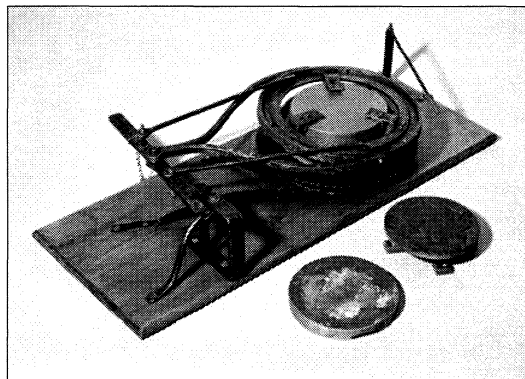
Hand-operated polishing and grinding machine used by Sir William Herschel to make 6-inch telescope mirrors.
